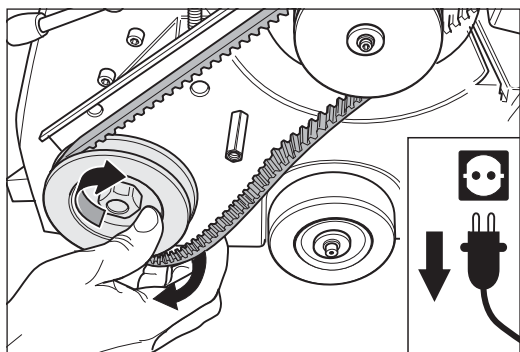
Allow the drive belt to run off the lower pulley. If necessary use the box wrench (see tool bag) to help you, but turn the box wrench exclusively in the clockwise direction in order not to loosen the nut of the lower pulley.
